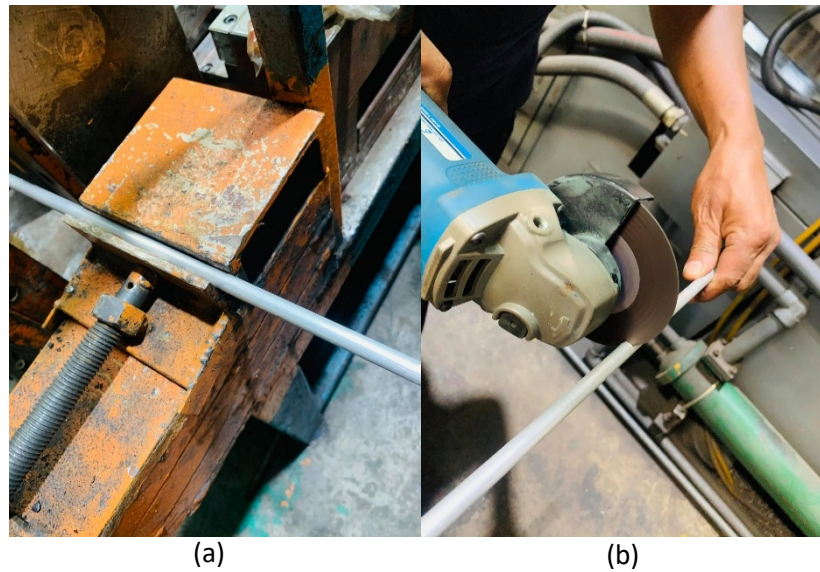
(a) Clamp the hollow aluminium rod using a clammer, (b) Cutting process of the hollow aluminium rod using an angle grinder
